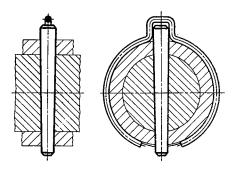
Taper pin locked by retaining ring having a loop for pin end
